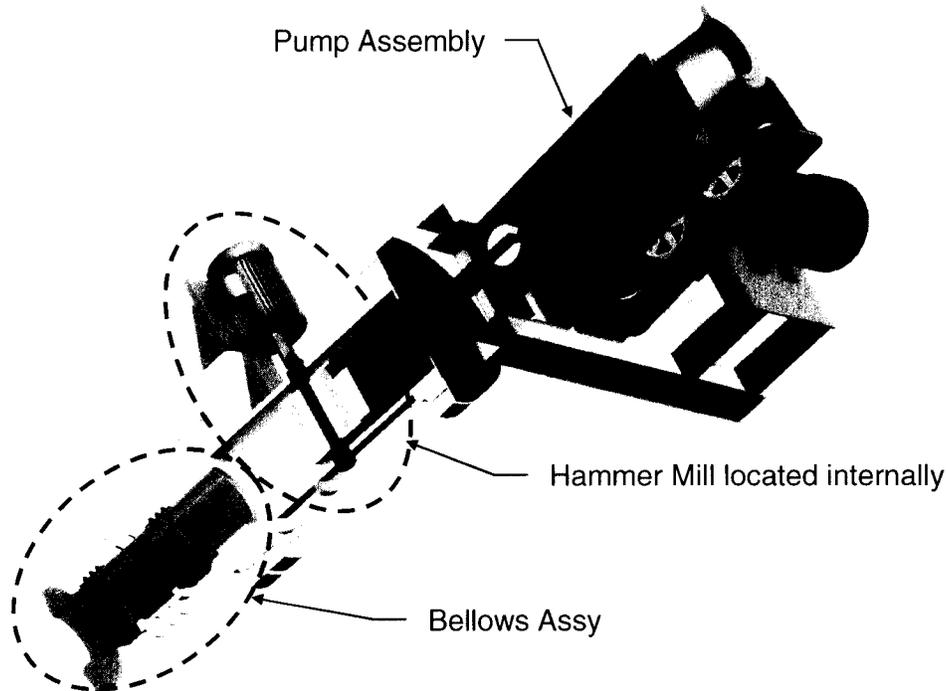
Overall Layout of Rolling Mill Linear Extrusion Pump
